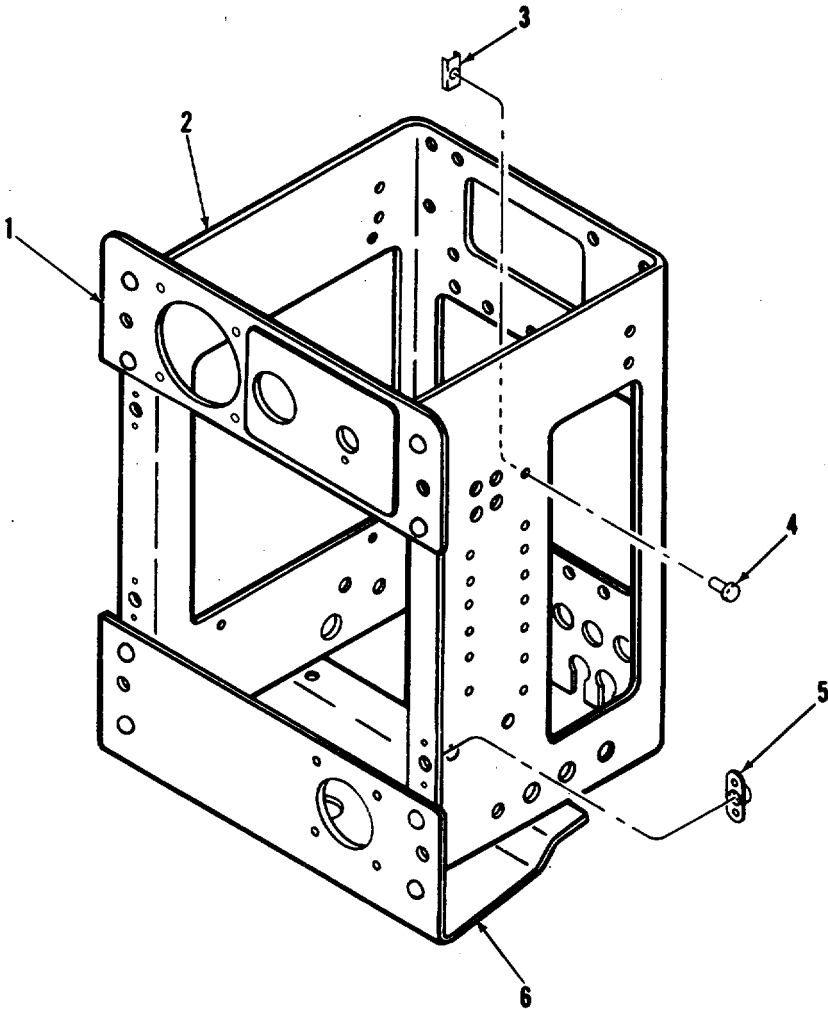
Chassis Assembly Metal 114E2184-11, -13.
